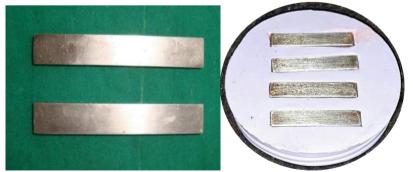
The metallic master mold of standard dimensions 10x 2.5x 55mm- ASTM A370 and flasked dies
